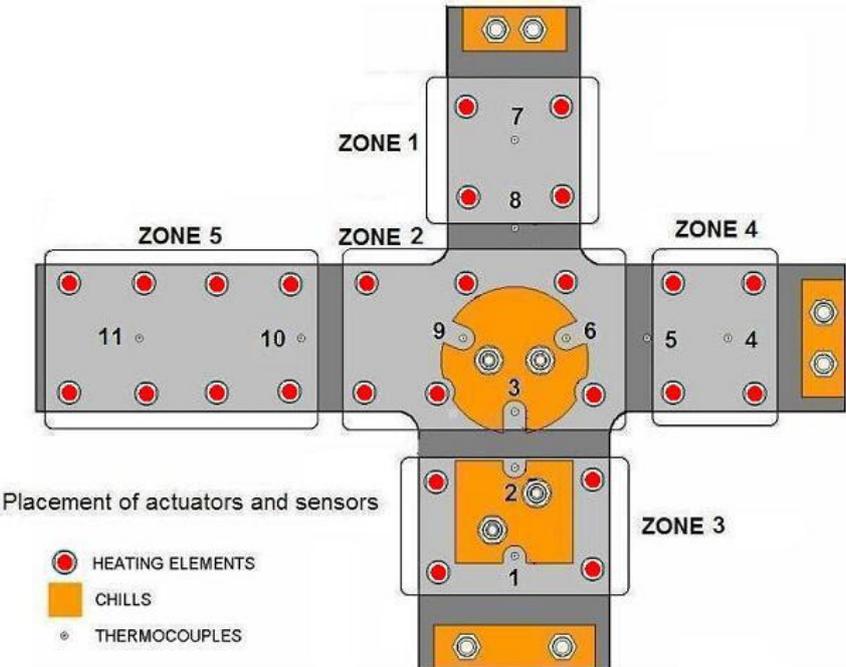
Thermocouples sensing elements, cooling and heating elements located on body of foundry mold [3].
